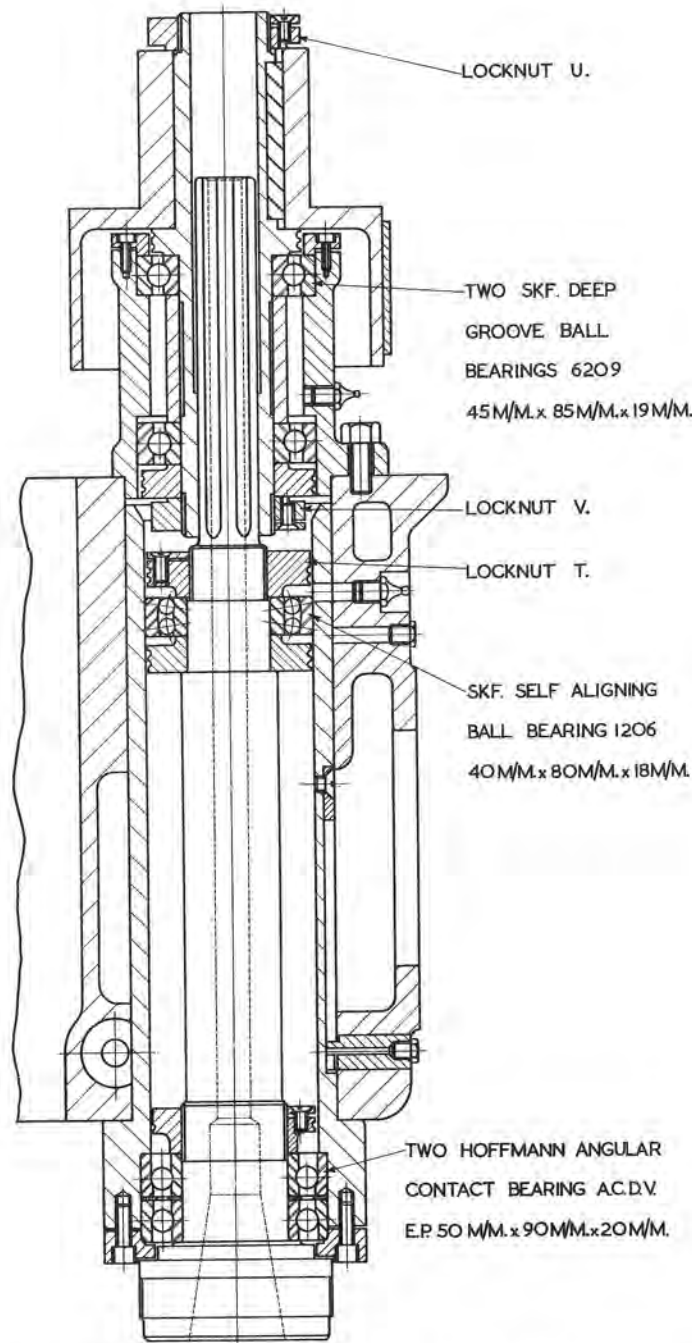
SECTION THROUGH CUTTER SPINDLE FOR L.H.3. MACHINE.
